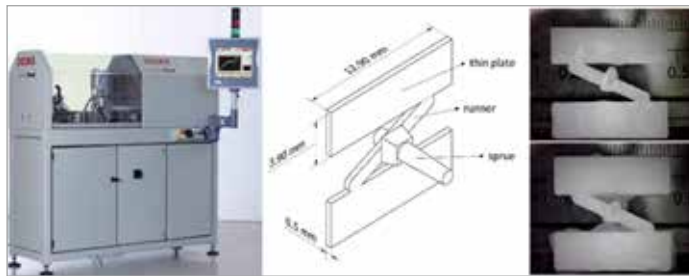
Micro injection moulding machine and test specimen details on flash defect analyzed
